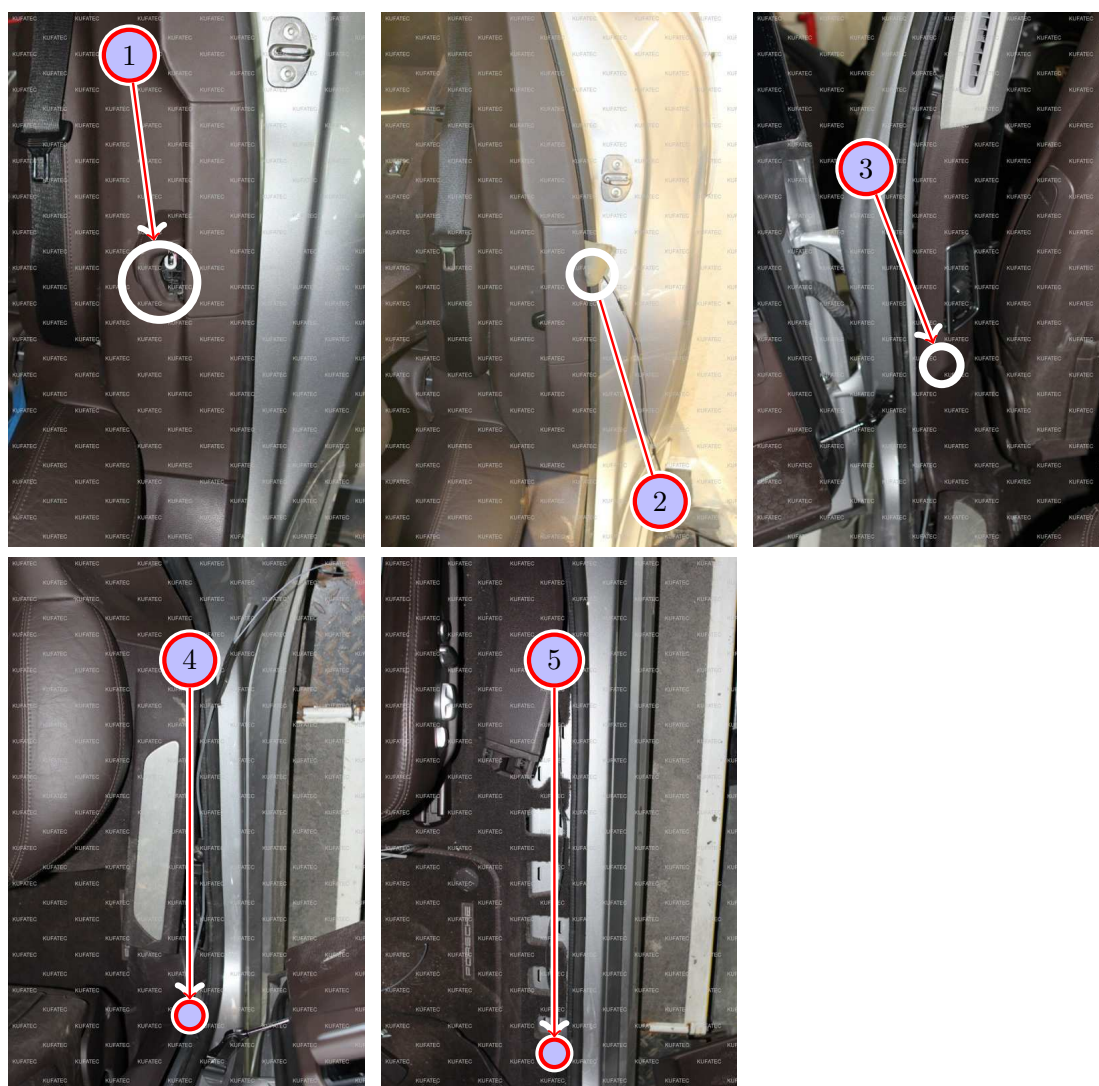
Pictures for Laying the Sensing Device Cable to the front
